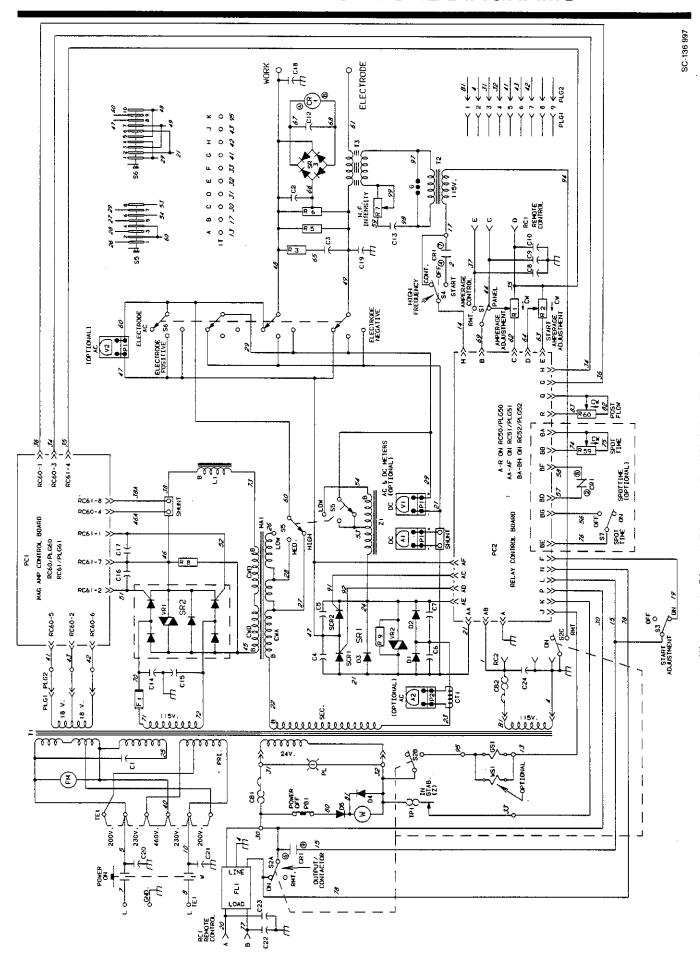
Circuit Diagram For Welding Power Source
